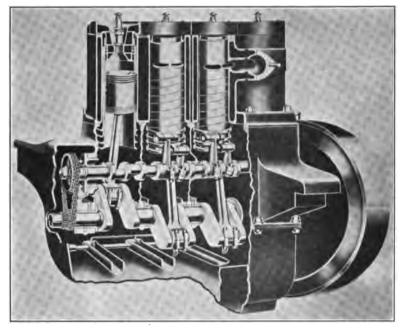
Stearns-Knight Four-cylinder Motor — Longitudinal Section.
